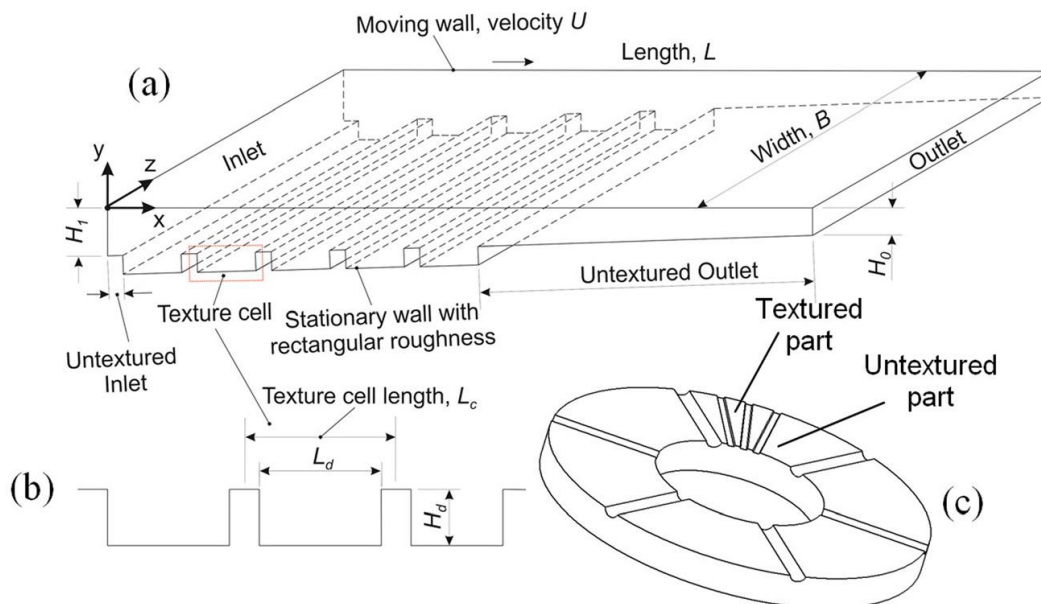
Micro-thrust bearing geometry. (a) Three-dimensional textured converging slider geometry
